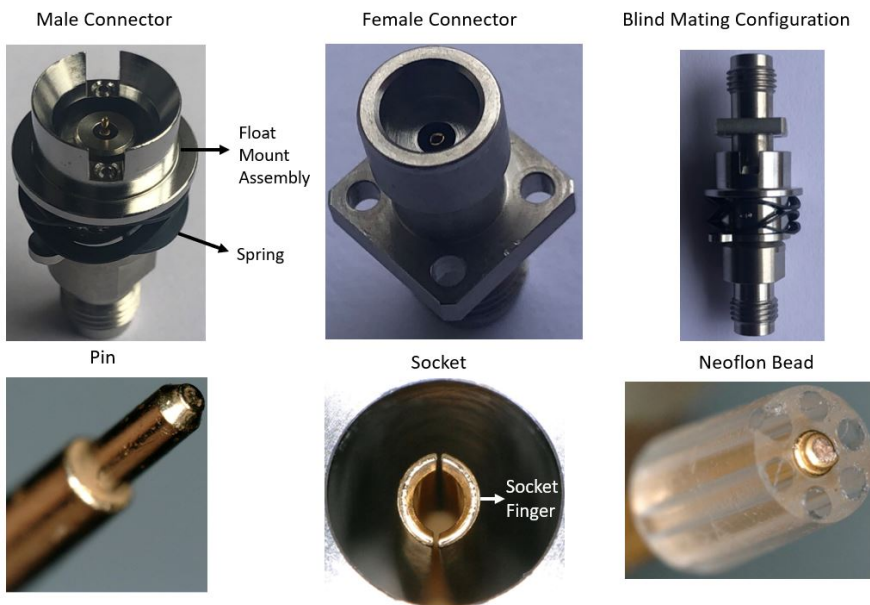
Manufactured Blind Mating 1.85 mm coaxial connector with its components.
